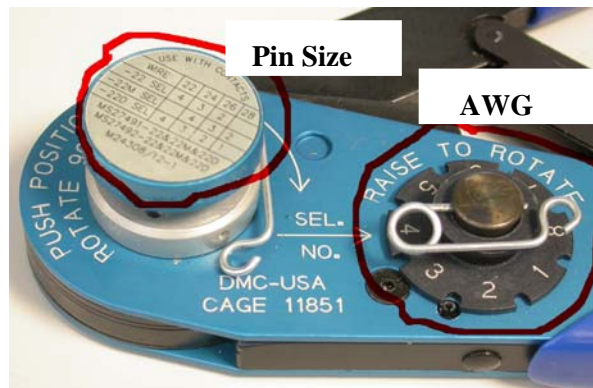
crimping tool M22520/2-01 and turret M22520/2-09
